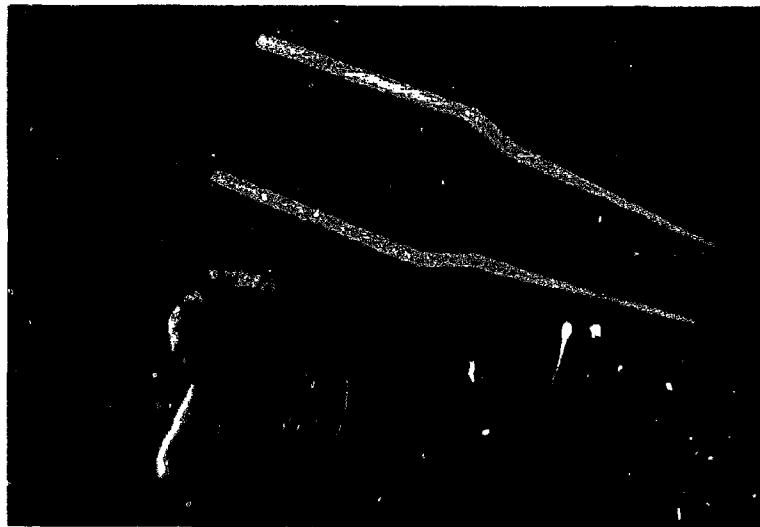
Configuration of Turbulating Rib Specified on Casting Drawing.
